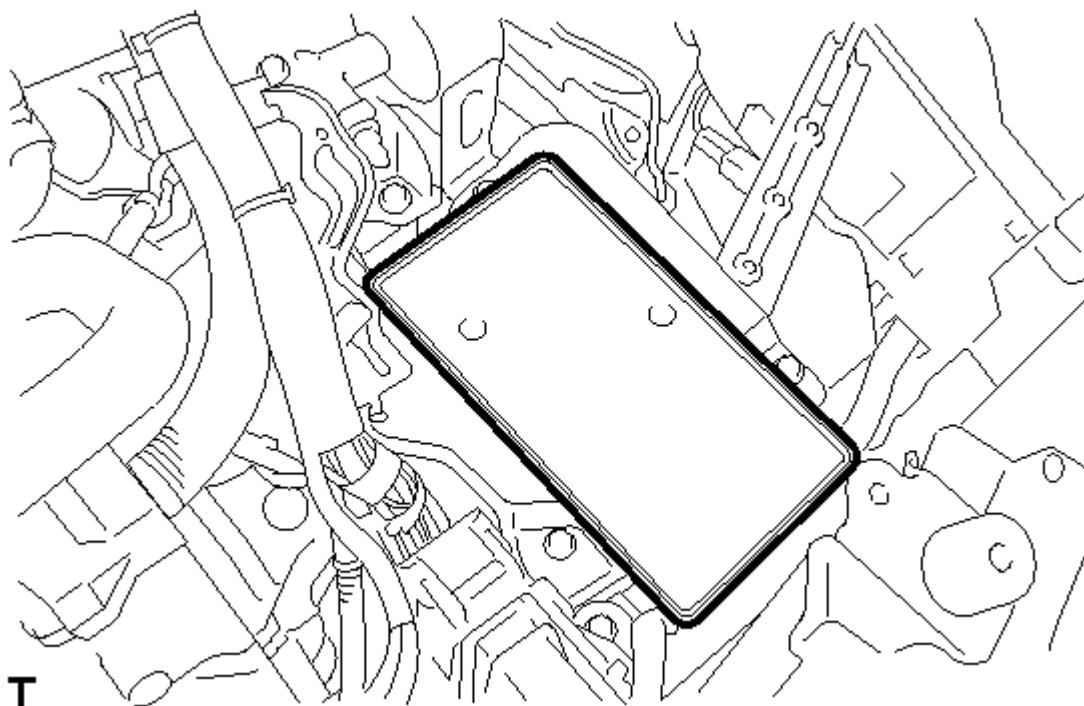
Identifying No. 3 Engine Under Cover Clips
